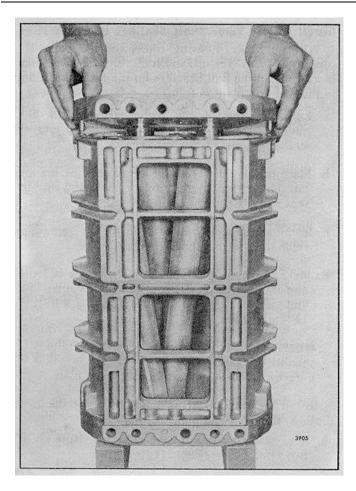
Installing Rear End Plate on Blower Rotors and Housing
